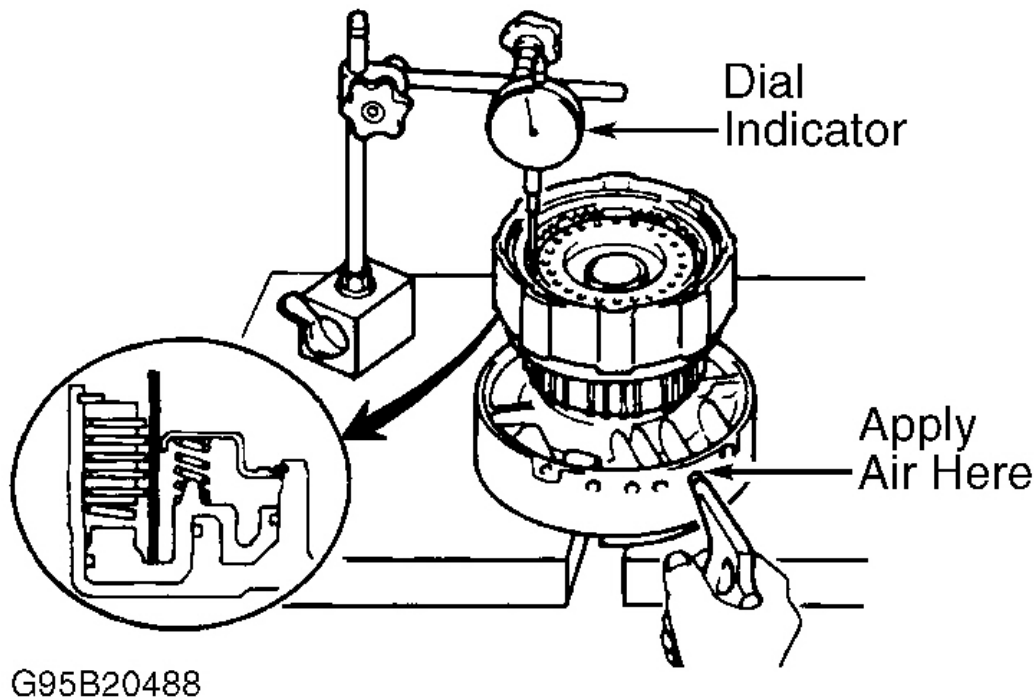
Removing Forward Clutch Piston & Measuring Stroke
